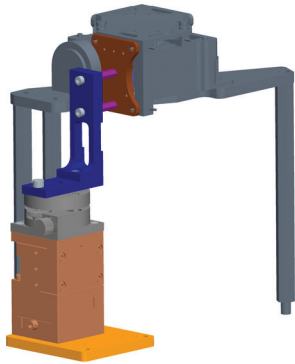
Example of an assembly fixture to precisely locate optics prior to applying UV cured adhesive.
